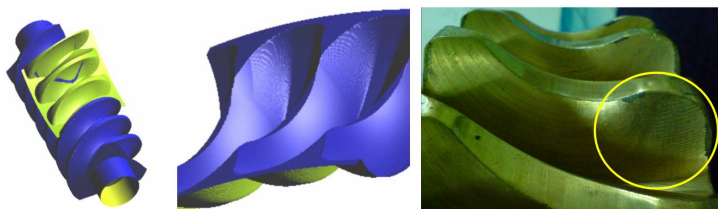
The ZTA worm gearing with the contact line, the calculated worm wheel segment and the manufactured real worm wheel surface
